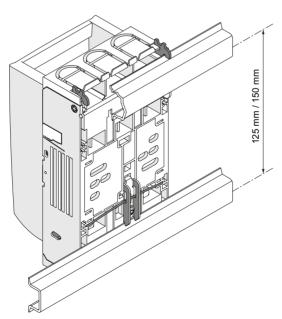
Mounting the fuse switch disconnector, sizes 00 and 1 onto a standard rail (2)
